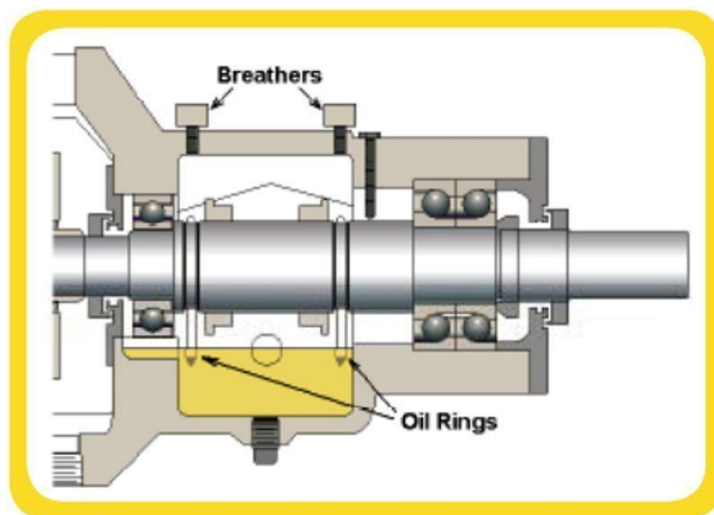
A typical bearing housing, shown here without modern bearing protector seals
